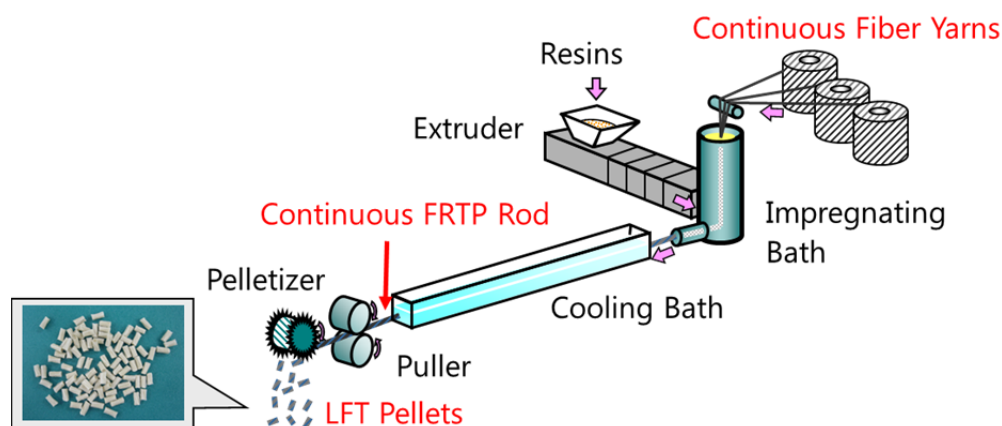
A scheme of manufacturing machine for LFT pellets.
